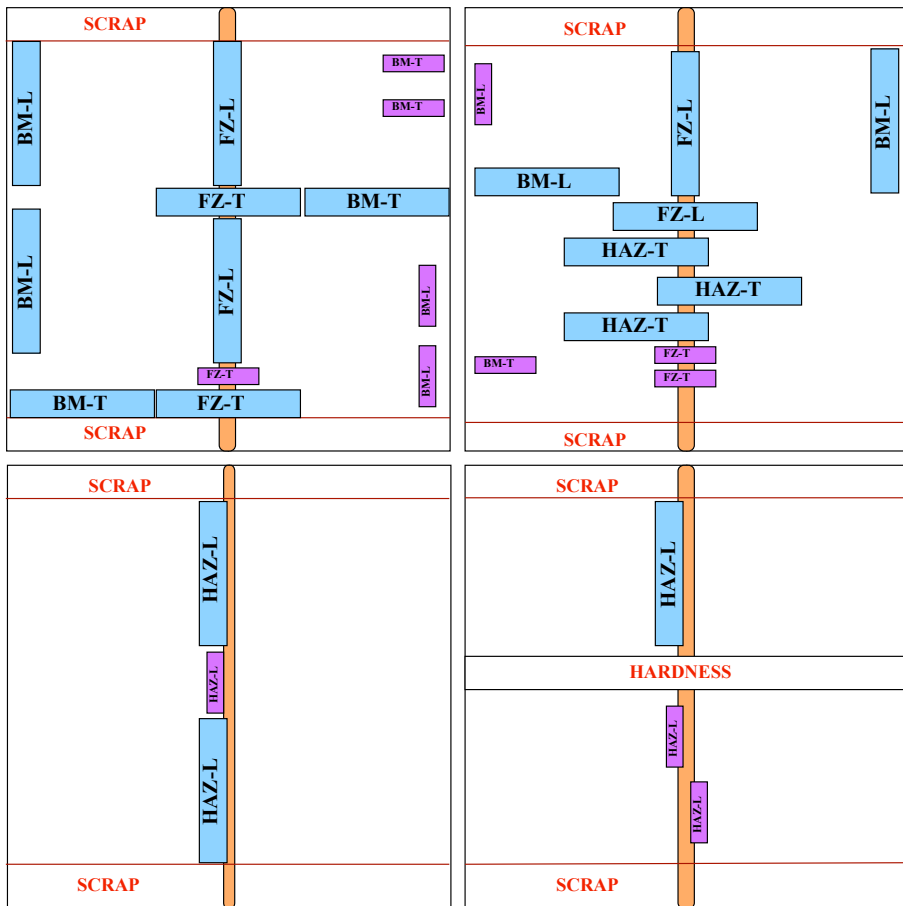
Location and orientation of specimens used for the tensile and Charpy V-notch testing of the GMAW weldments.
